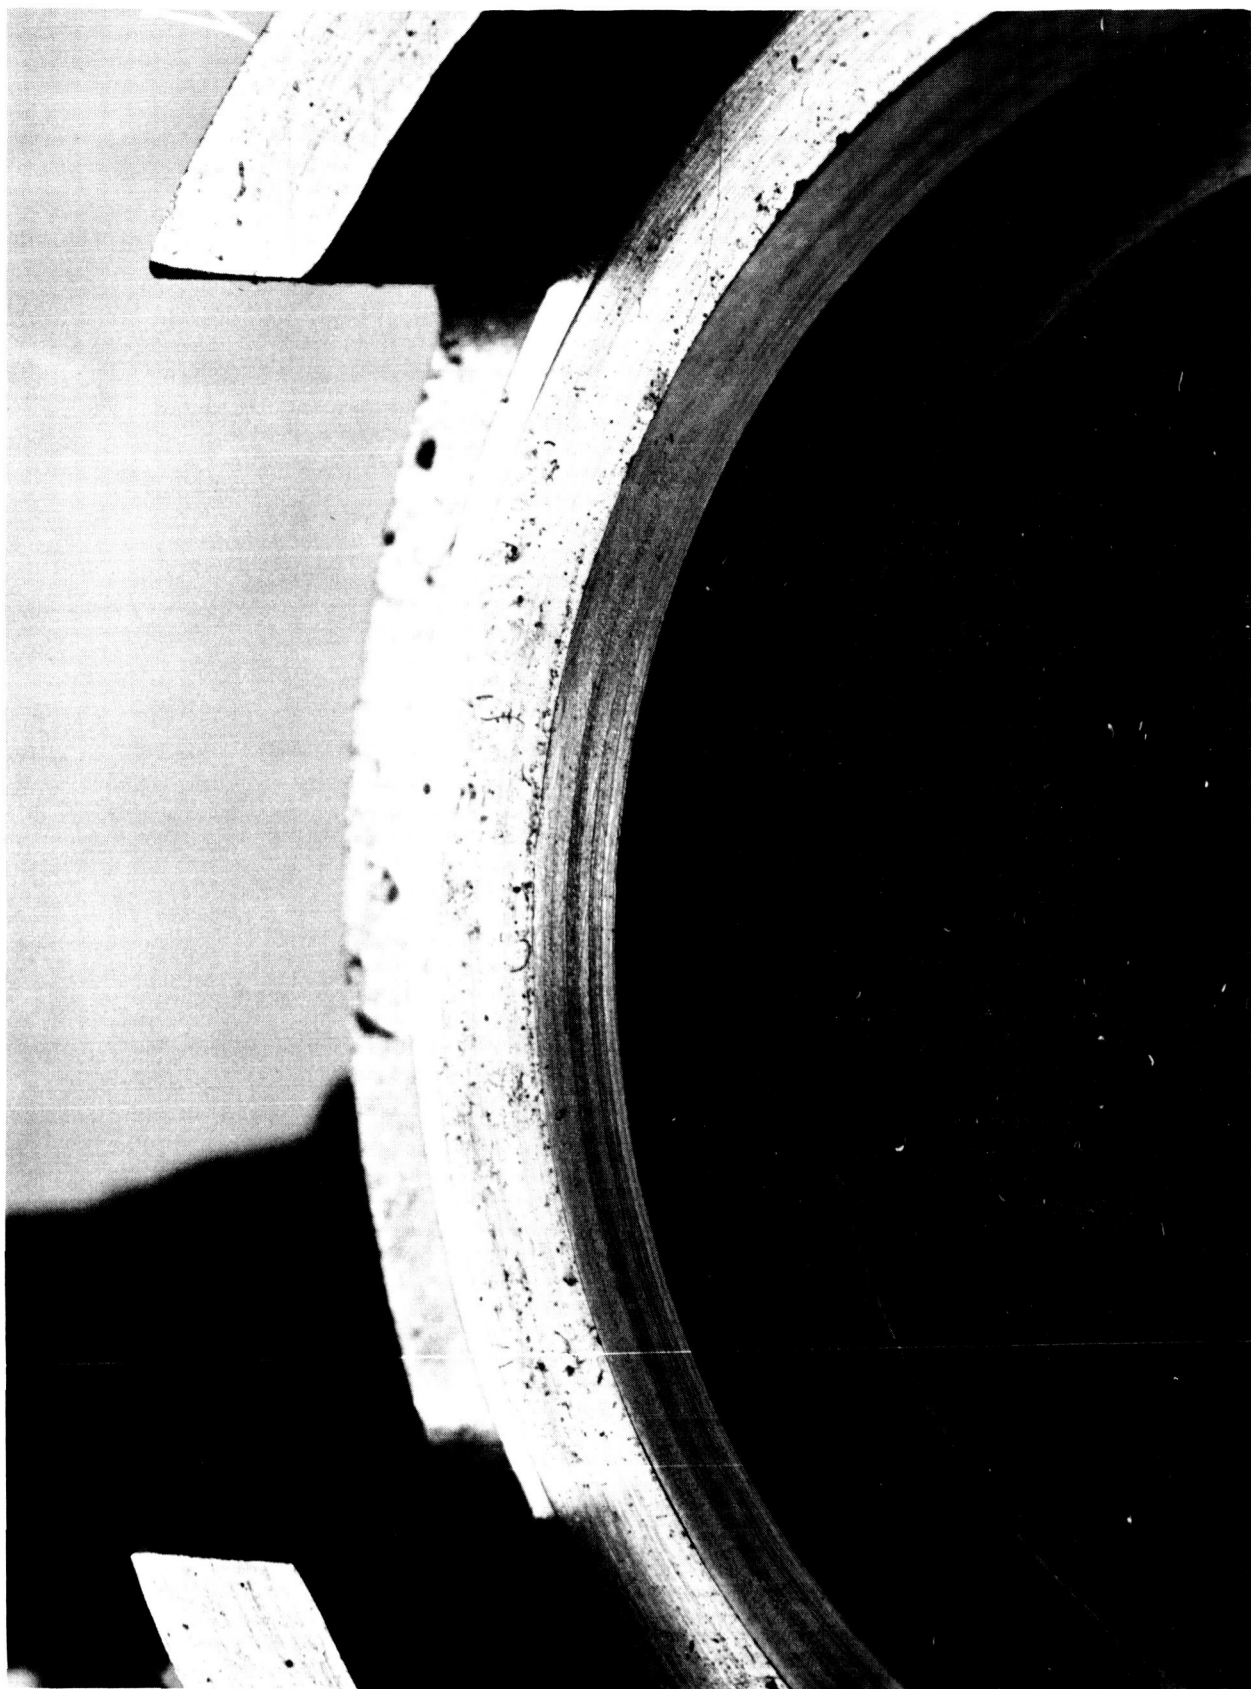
CLOSE-UP OF CARBON SEAL FACE
